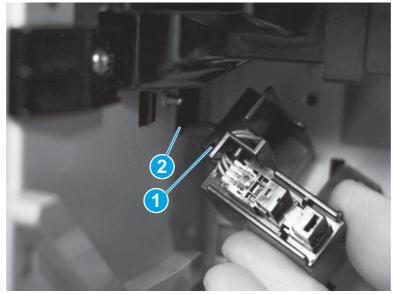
Remove the fuser home position sensor (3 of 3)
